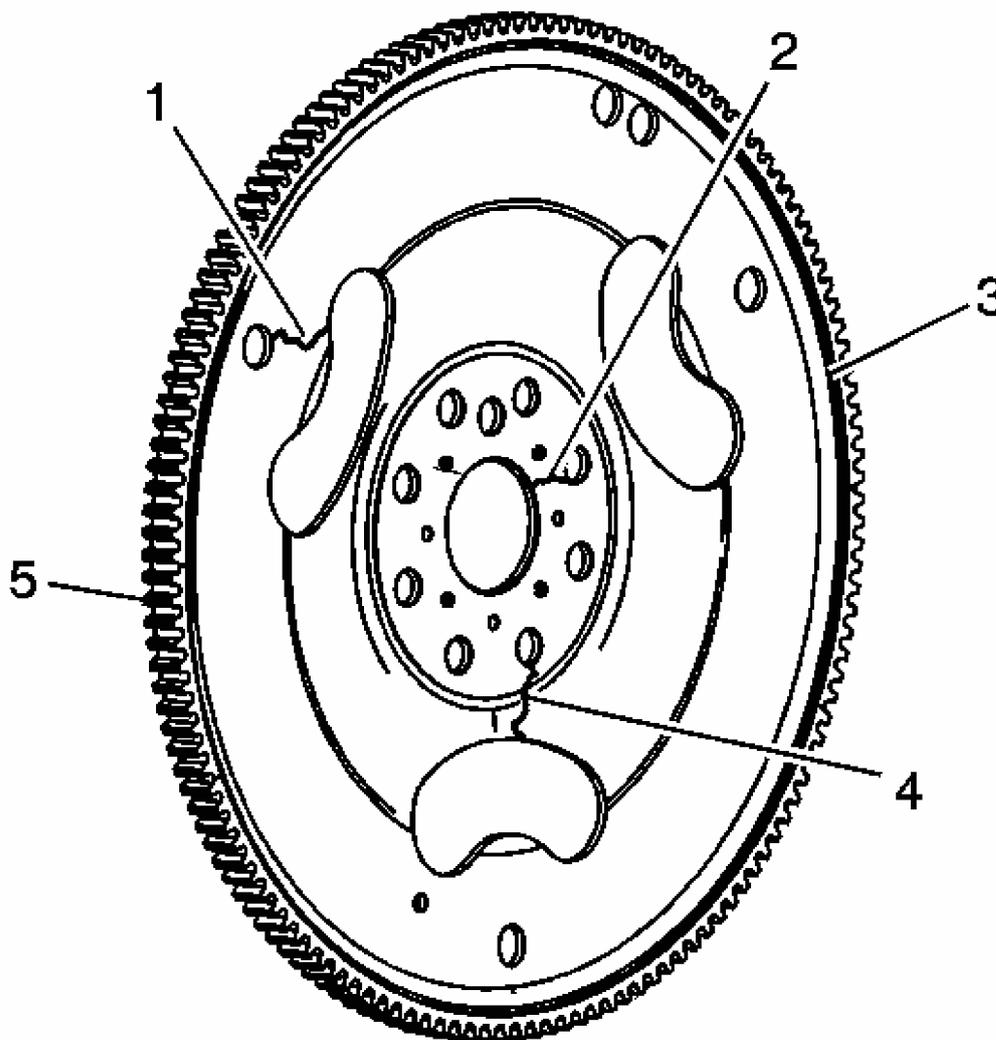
Inspecting Automatic Transmission Engine Flywheel For Damage
